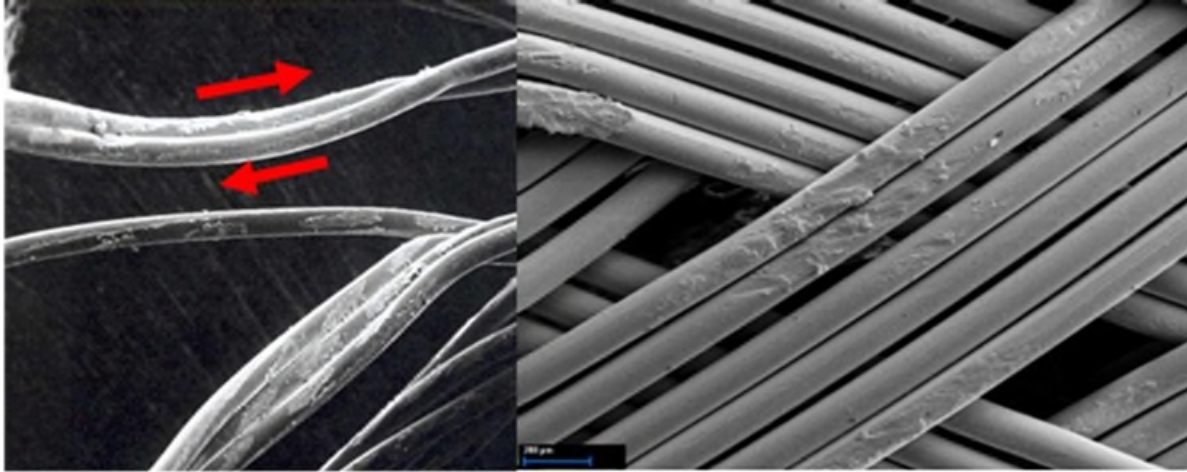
stranded wires with typical signs of cold welding (photo credits: AAC)
